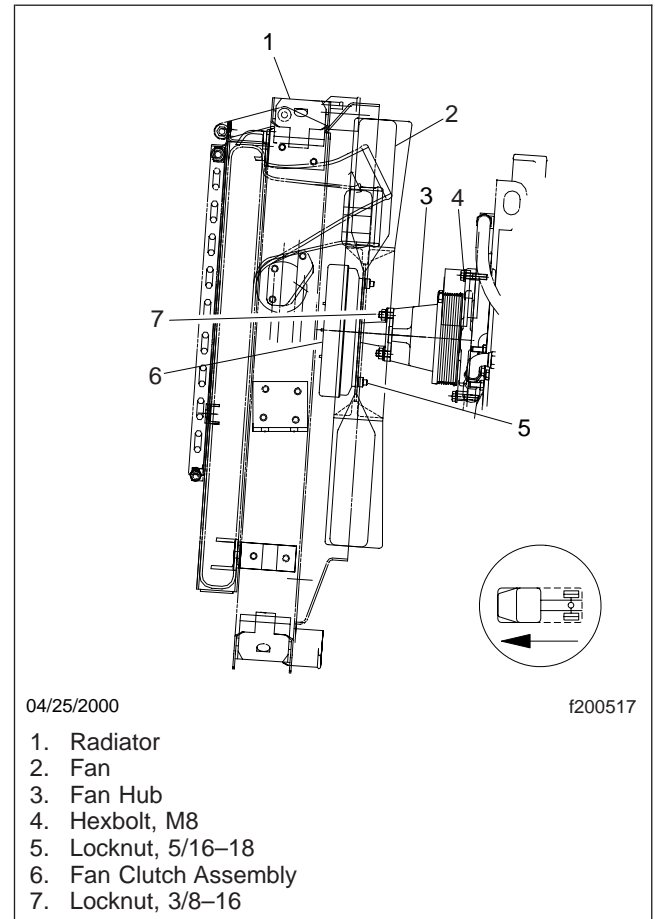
, Viscous Fan Clutch Mounting, Caterpillar 3126 Engine
